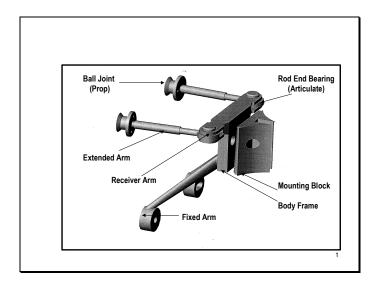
(b): Isometric View of Improved Spider and Mounting Block.
